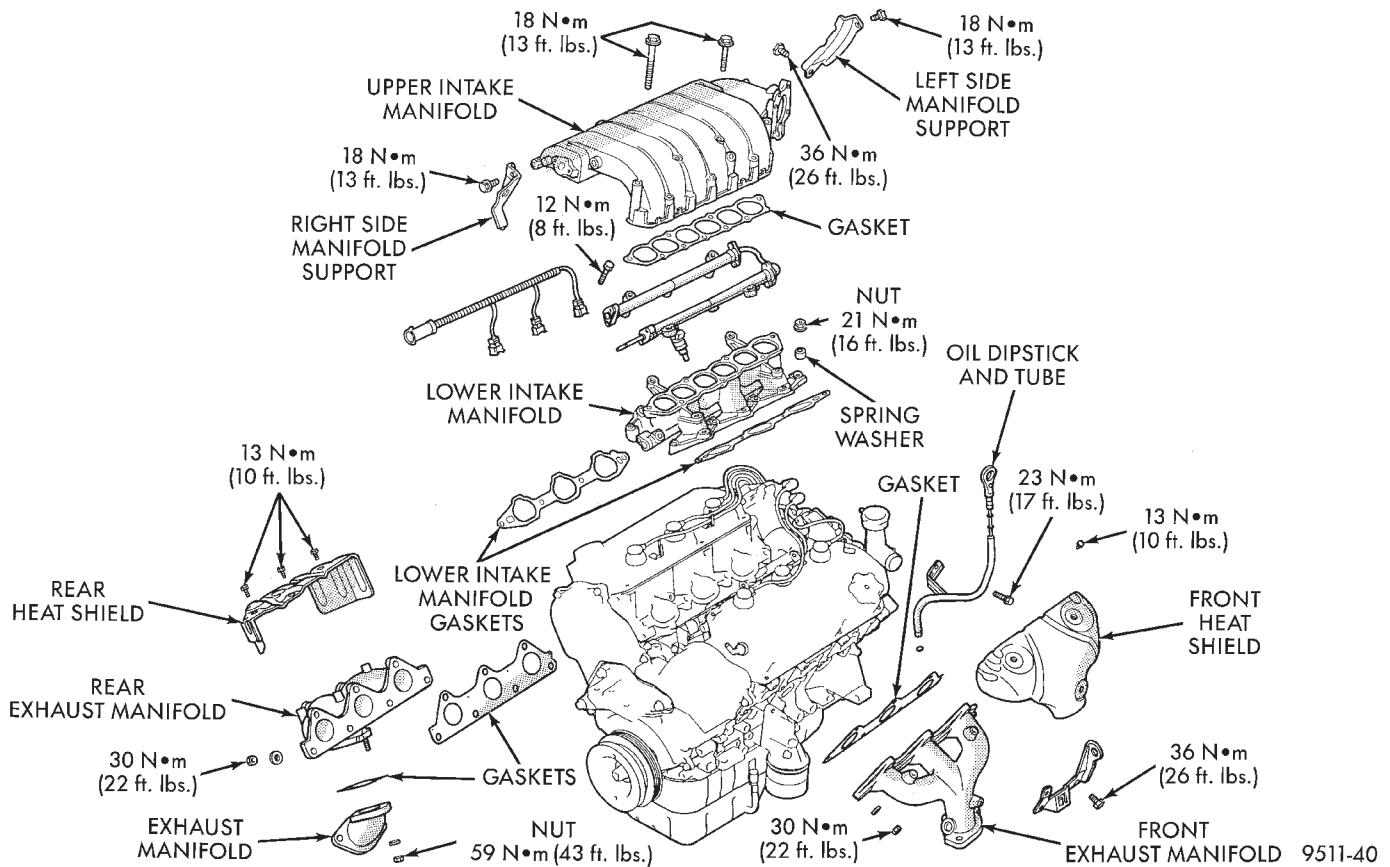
Intake and Exhaust Manifolds—2.5L Engine
